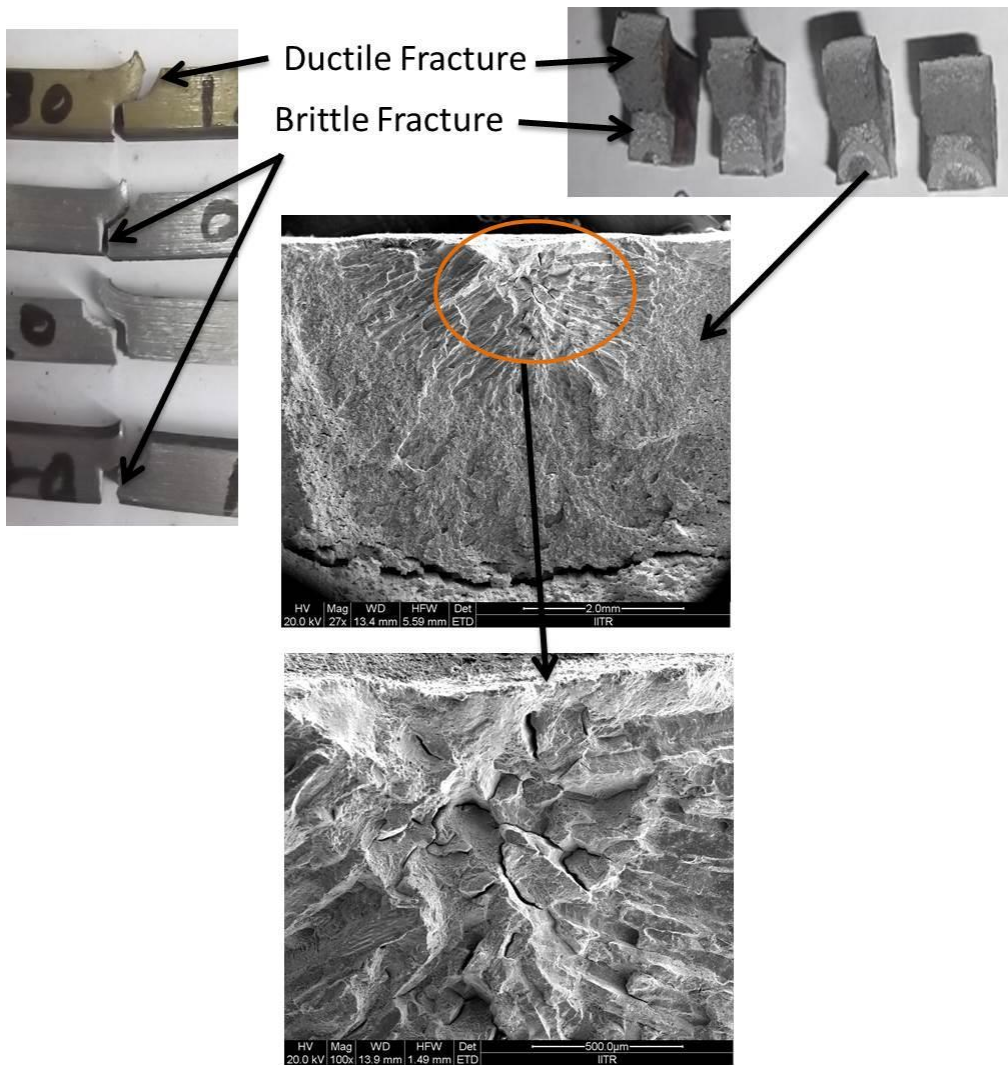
Macro and micro fractographs of flexural test failed under bending load.
